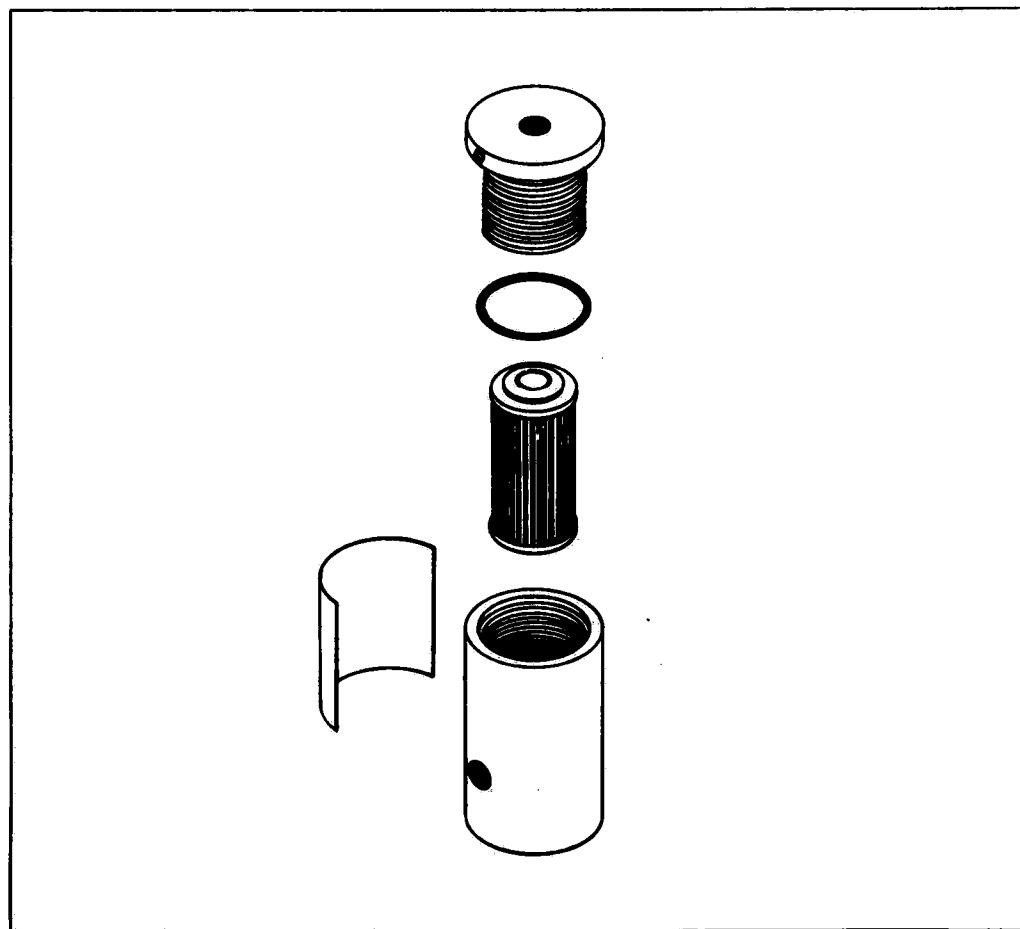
A. Oil Filter Assembly (Units Shipped After 2/78).
